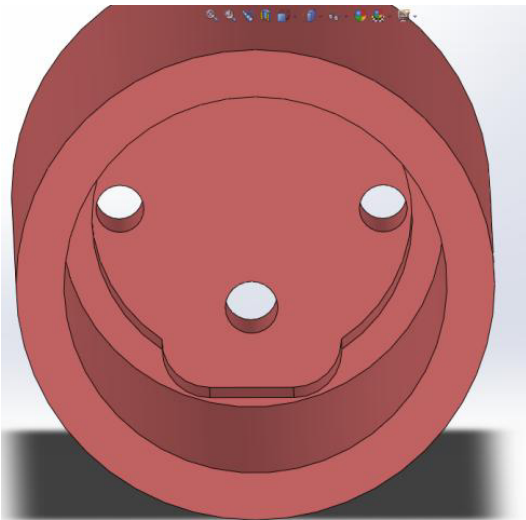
'back mount'. Used to mount the laser and then screw optics into.
